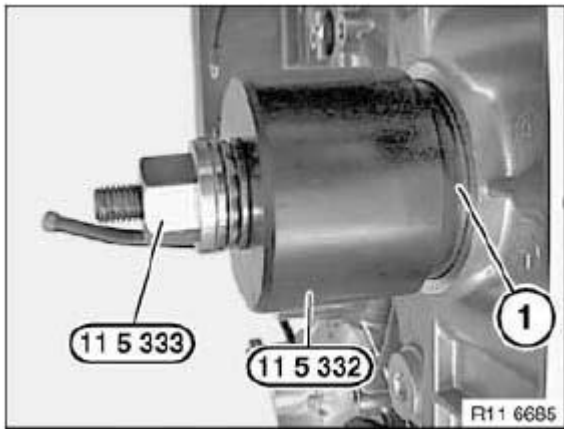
Identifying Radial Shaft Seal, Special Tools 11 5 332 And 11 5 333
